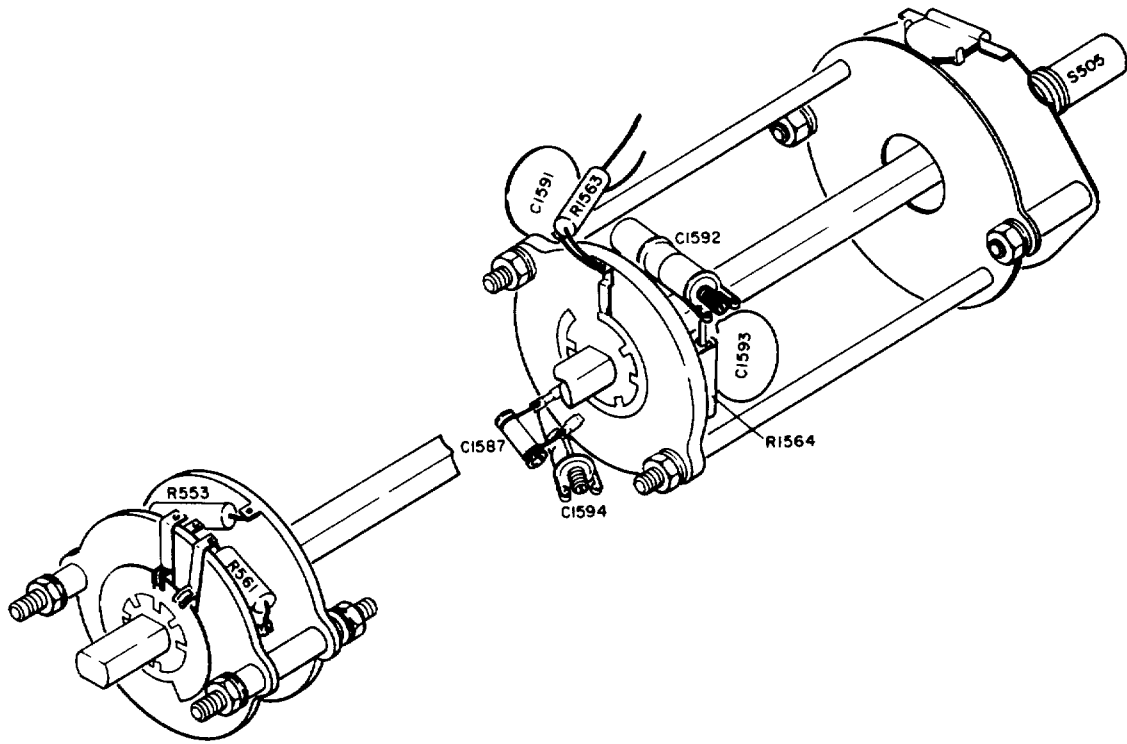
MX-2930B/USM Vertical Presentation Switch Assembly, Location of Parts
